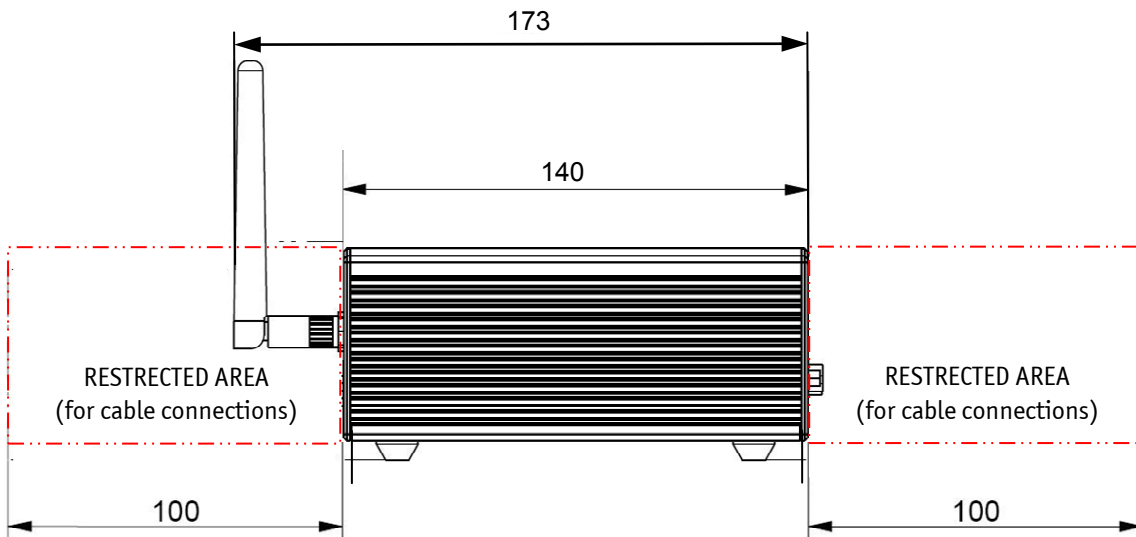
Dimensions in the side view (desktop with optional antenna)
